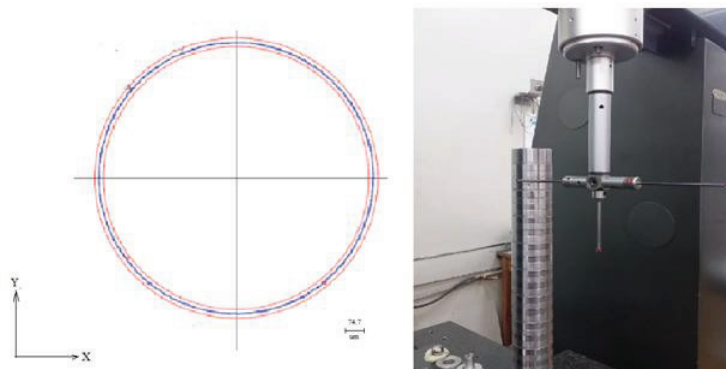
Out-of-roundness measurements of the workpiece using a CMM machine.
